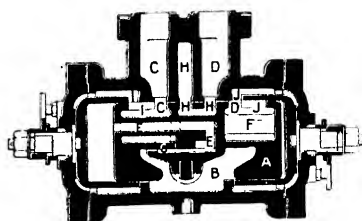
SECTIONAL PLAN OF VALVE CHEST
